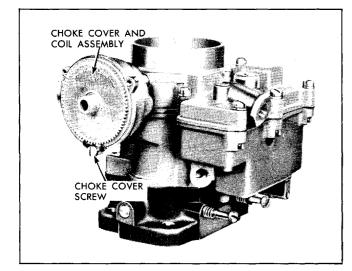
B-85 Removing or Replacing Choke Cover Assembly
